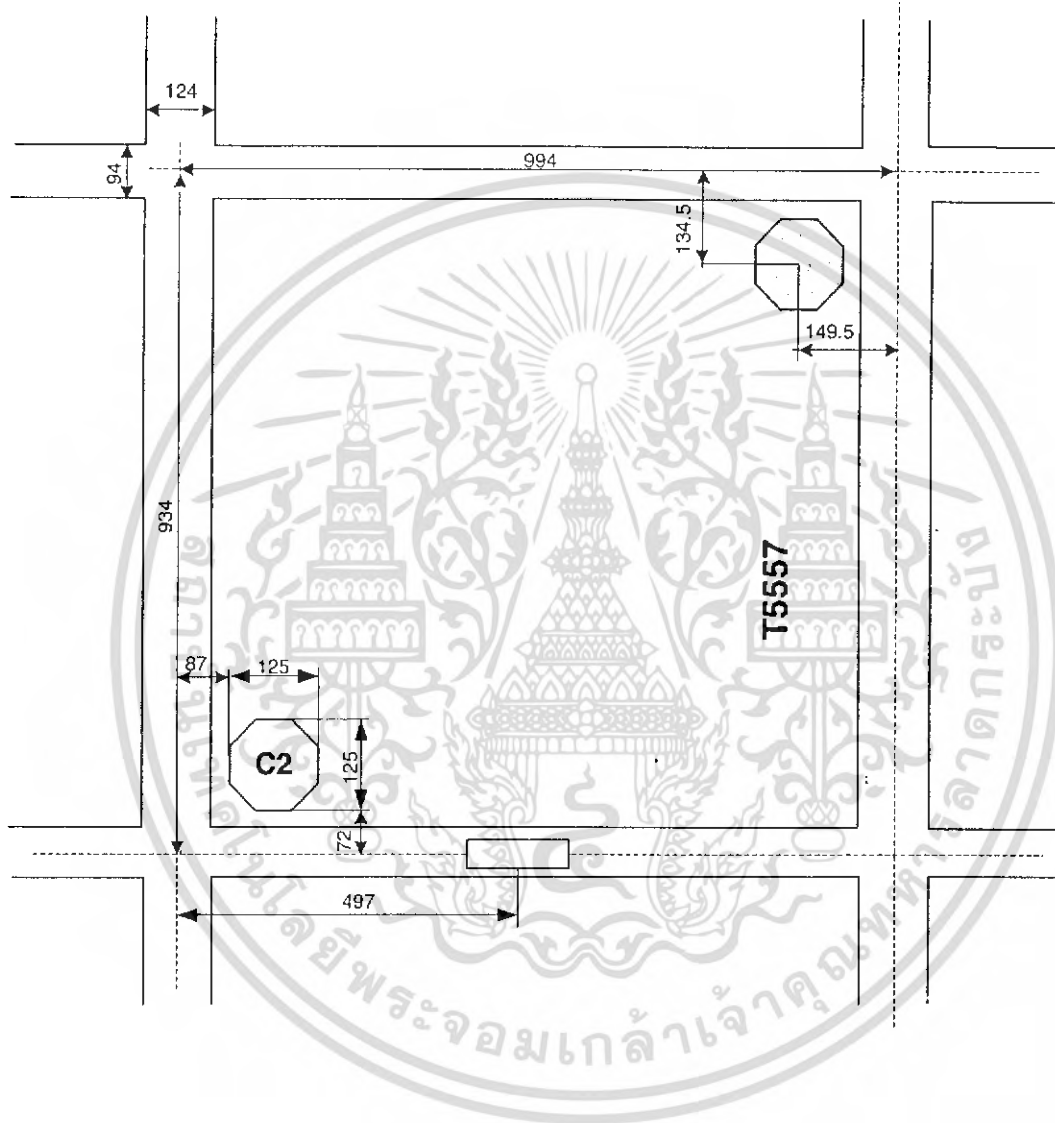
4 Pad Flip-chip Version with 70  $\mu\text{m}$  Solder Bumps
